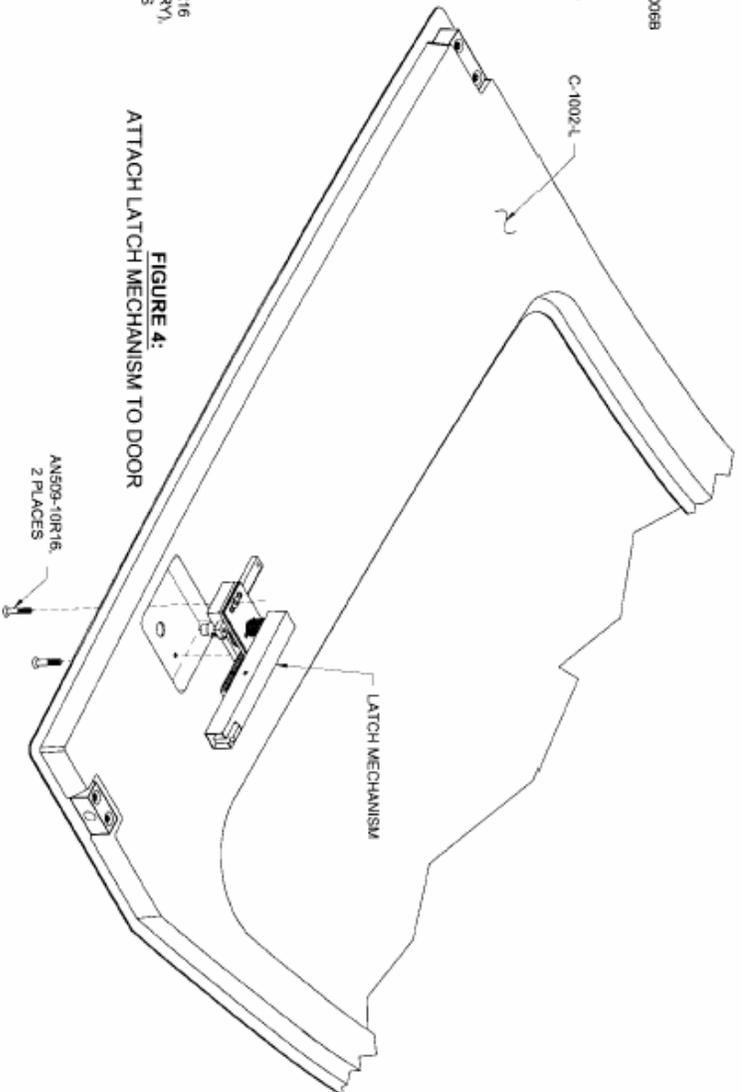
ATTACH LATCH MECHANISM TO DOOR
